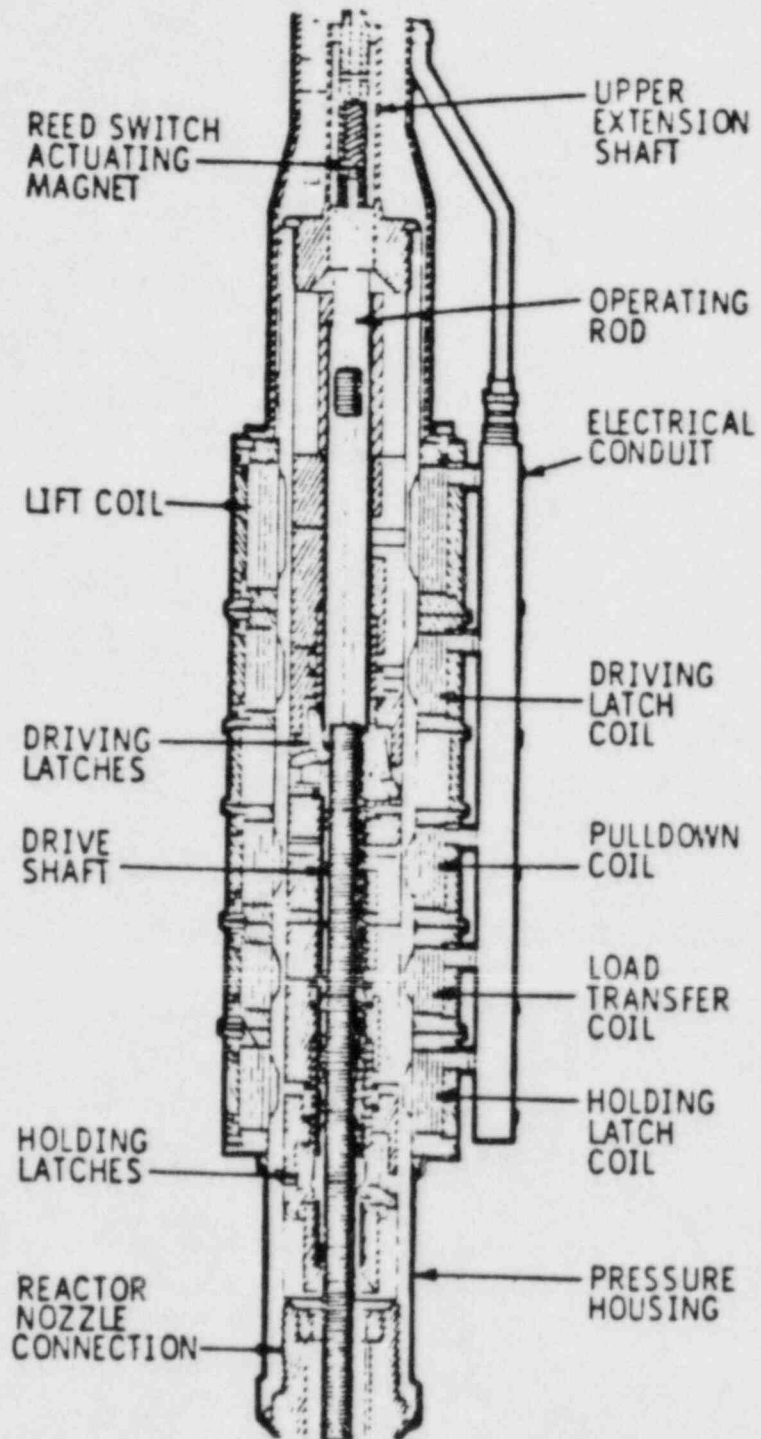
Control Element Drive Mechanism (Magnetic Jack)
